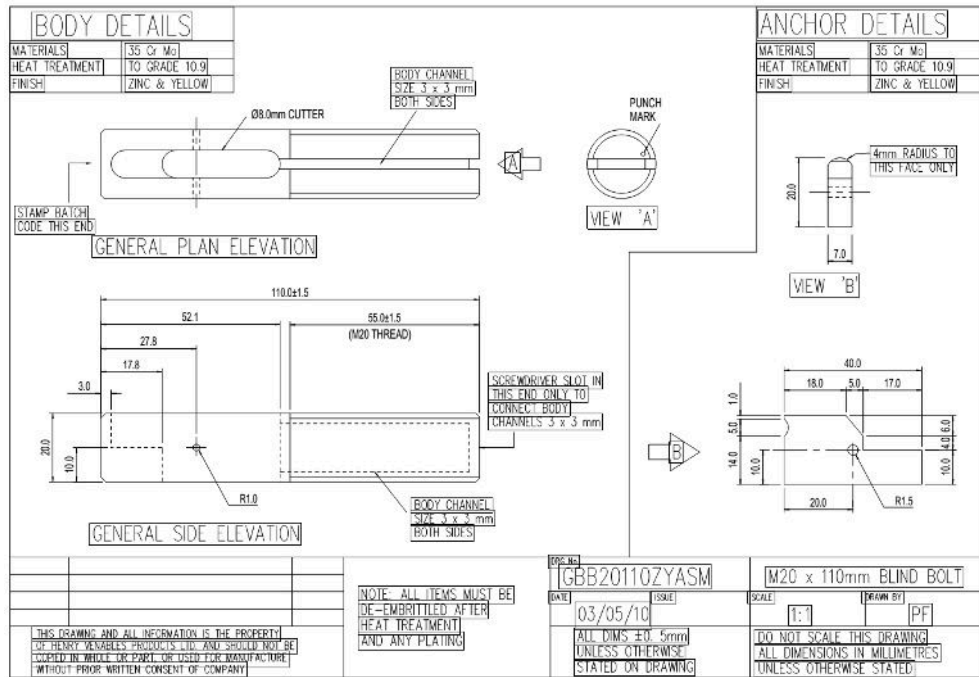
Dimensions and geometric tolerance for blind bolts M20
